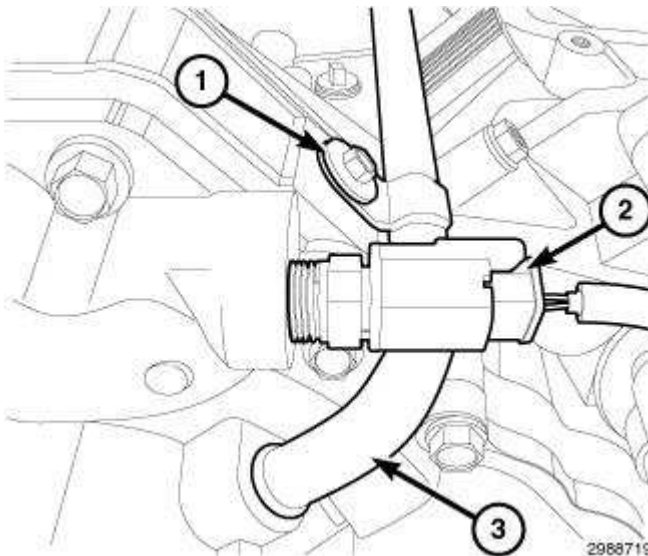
Coolant Temperature (ECT) Sensor Electrical Connector, Heater Tube & Retaining Bolt
